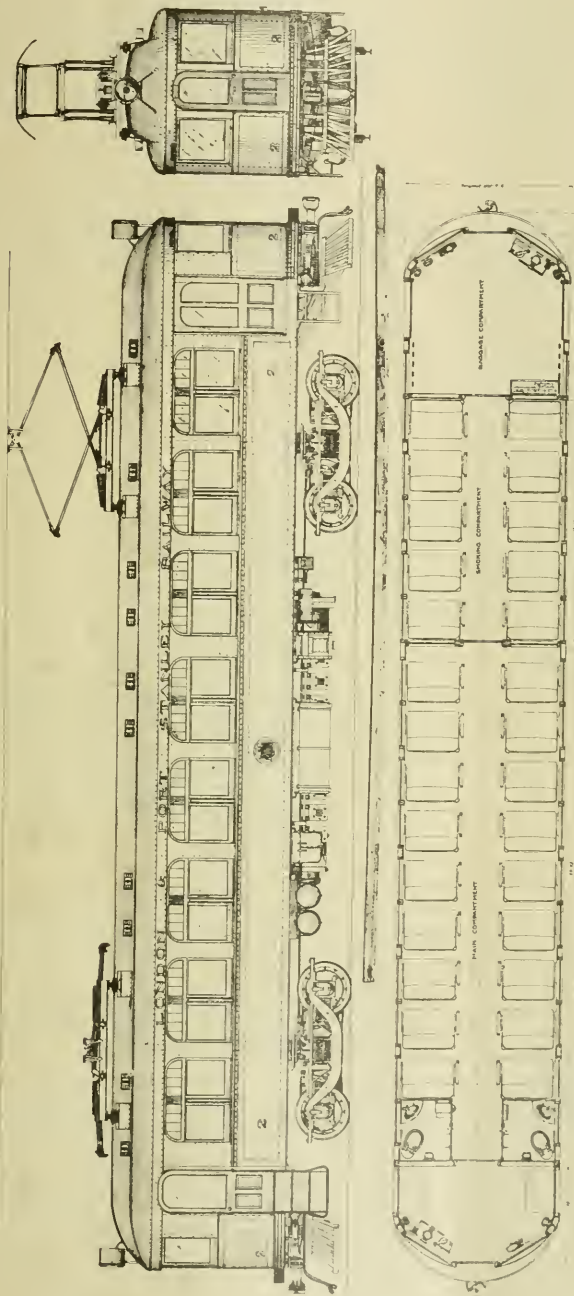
Plan of three-compartment passenger car typical of rolling stock used on the London & Port Stanley Railway System. Note design of pantograph.
